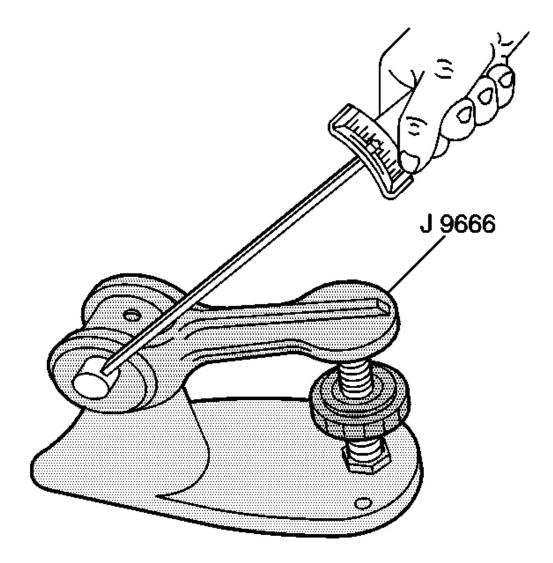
Measuring Valve Spring Tension Courtesy of GENERAL MOTORS CORP.
